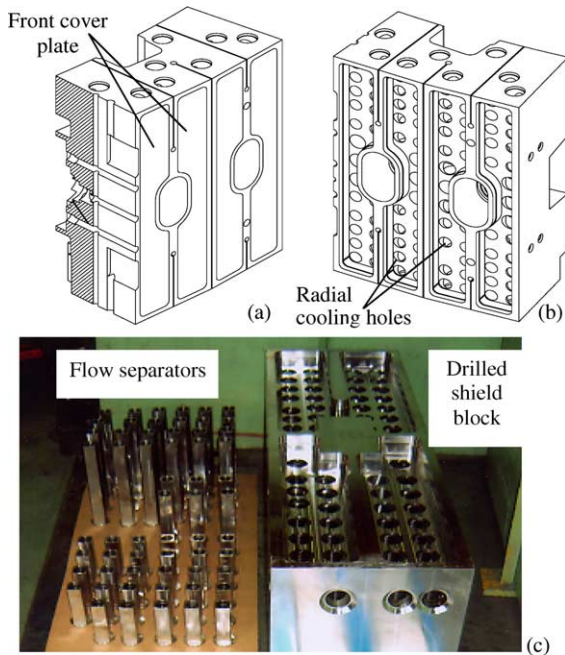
Radial flow shield block structure, (a) shield block with front cover plates, (b) shield block with radial cooling holes, (c) fabrication R&D (JAPT).
